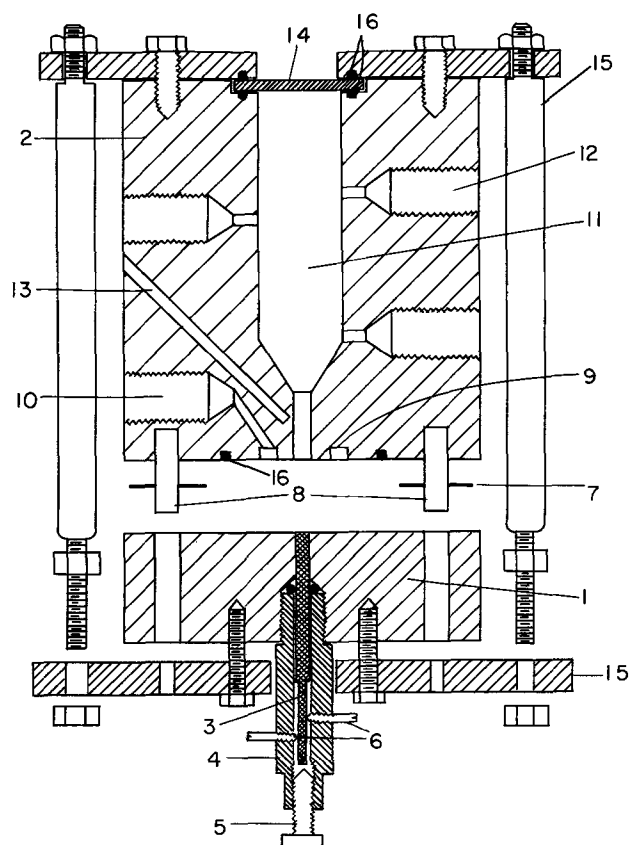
Exploded cross sectional view of the cell. 1 = Teflon bottom piece; 2 = KEL-F top piece; 3 = working electrode; 4 = nylon bushing; 5 = adjusting screw; 6 = stainless steel contacts; 7 = stainless steel spacer; 8 = stainless steel locating pins; 9 = reference electrode groove; 10 = reference electrode connection, and to vacuum; 11 = auxiliary electrode chamber; 12 = connections for auxiliary electrode, solution inlet, etc.; 13 = hole for illuminating fiber light guide; 14 = observation window; 15 = part of stainless steel frame; 16 = Viton O-rings.
